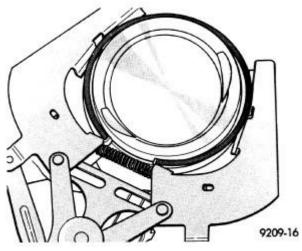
Piston Rings - Removal/Installation Courtesy of CHRYSLER GROUP, LLC
